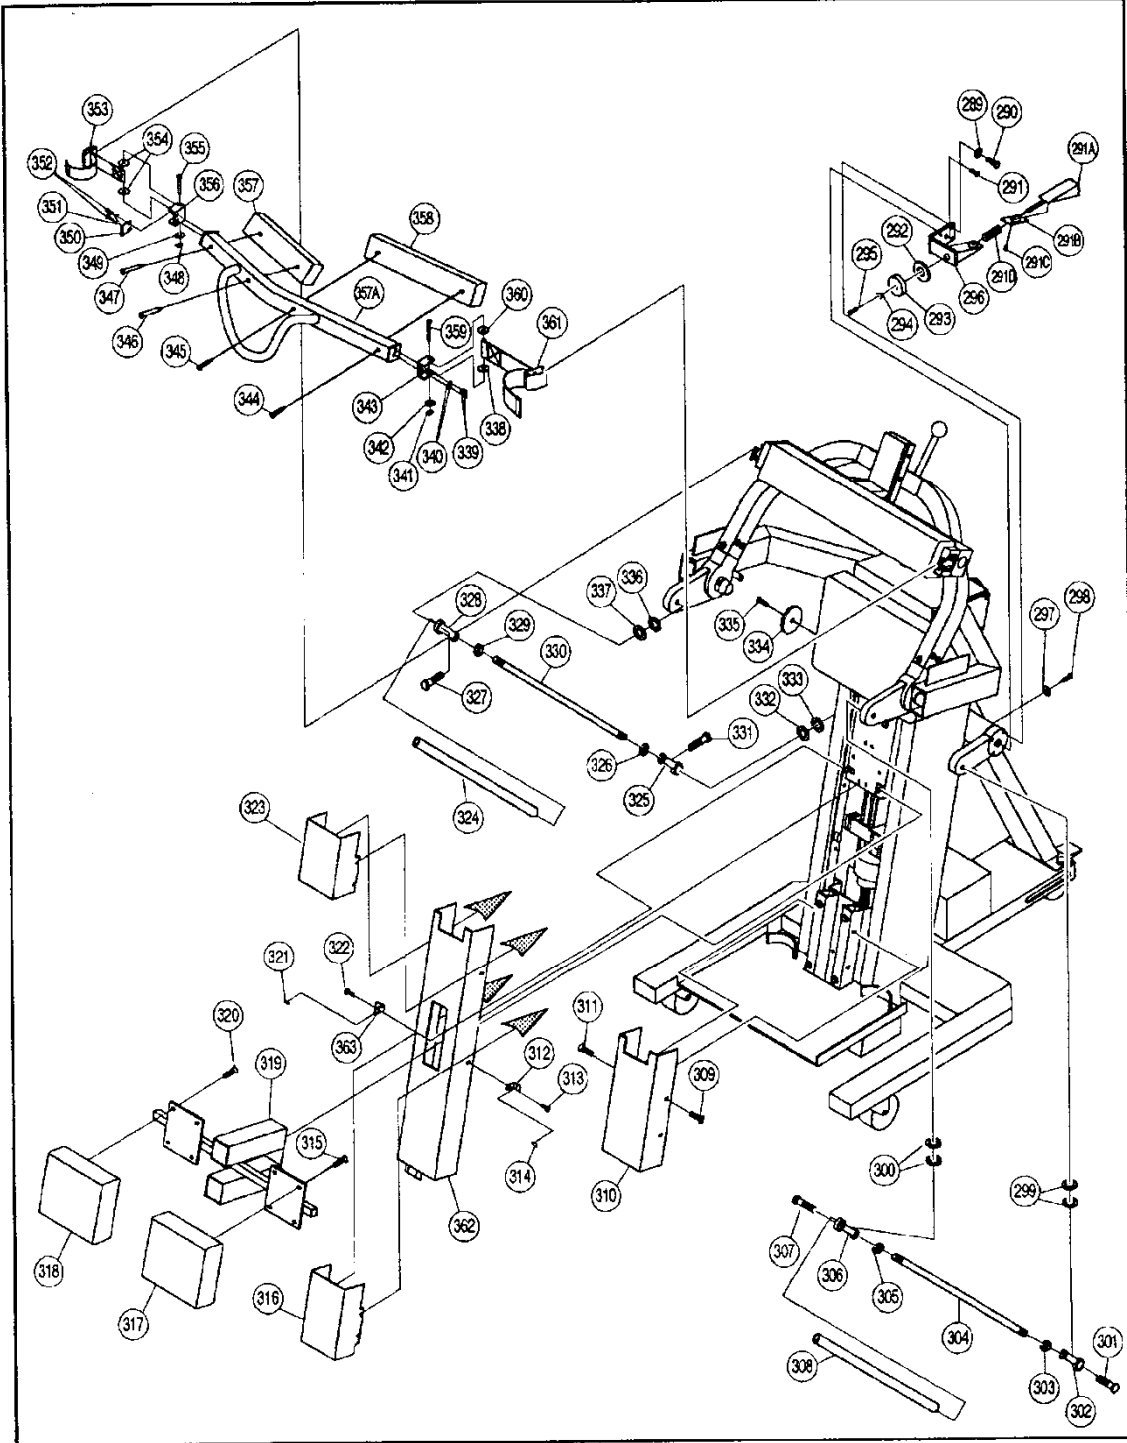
Chest Pad, Tie-Rod, Docking Adapter, Popliteal Tube Assemblies.
